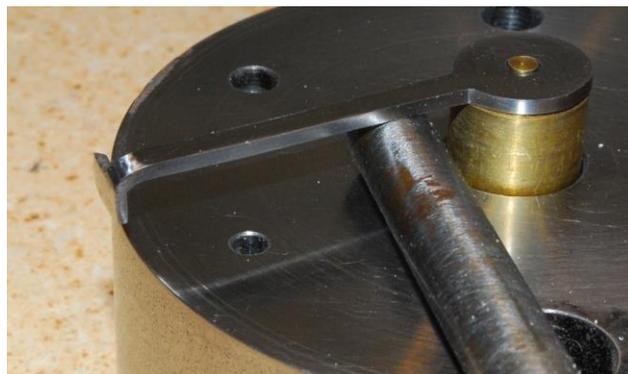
A 1/4" rod holds the pallet arm away from the bench block during heating. These photos were taken after the pallet was completed to recreate the process.
